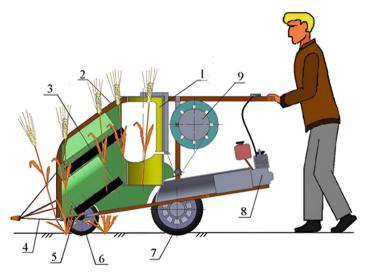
Schematic of a self-propelled reaper-binder machine: 1 – binder machine; 2 - frame; 3 – top and bottom carriers; 4 - divider; 5 – cutterbar; 6 - front wheel; 7 – driving wheel; 8 – gasoline engine «Druzhba»; 9 – twine reel.
